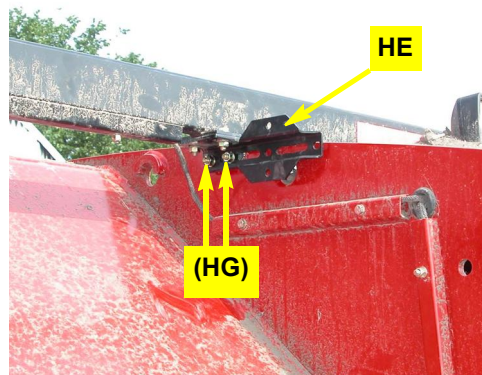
Installed steering block mounting bracket (use HG if necessary)
